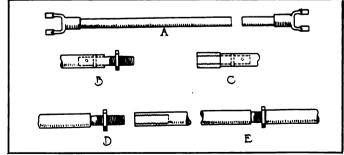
Converting Tierods into Adjustable Members: A, Where the Cut Should Be Made; B and C, Method Applicable to Tierod Constructed of Tubing; D, Plan for Solid Member; E, Showing Parts Assembled and Locking Nut in Place.
